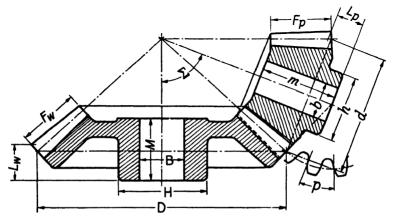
Essential Dimensions for Ordering Bevel Gears
